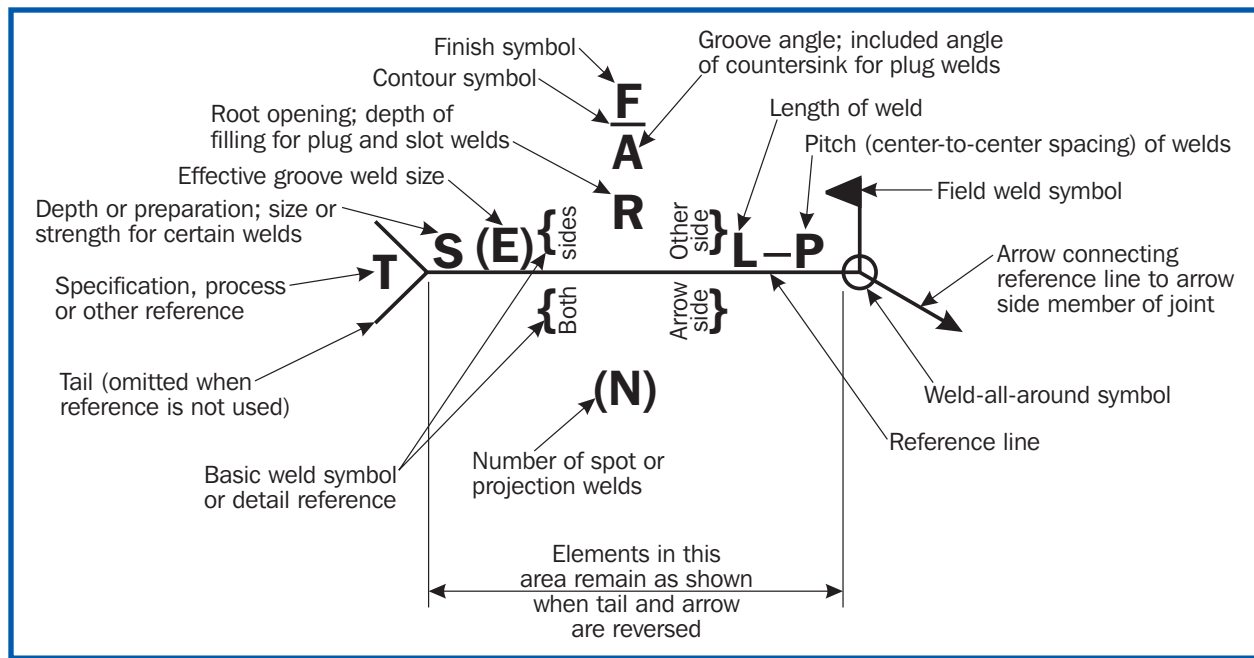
A welding symbol includes all the necessary information for the fabricator to create the exact weld required. (Adapted from Shanghai Jiao Tong University, Shanghai, China)
